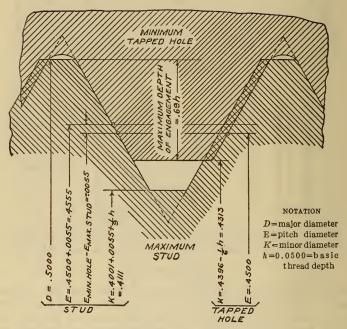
Illustration of tightest condition for class 5, wrench fit for threaded studs, one-half inch, 13 threads, set in hard materials
